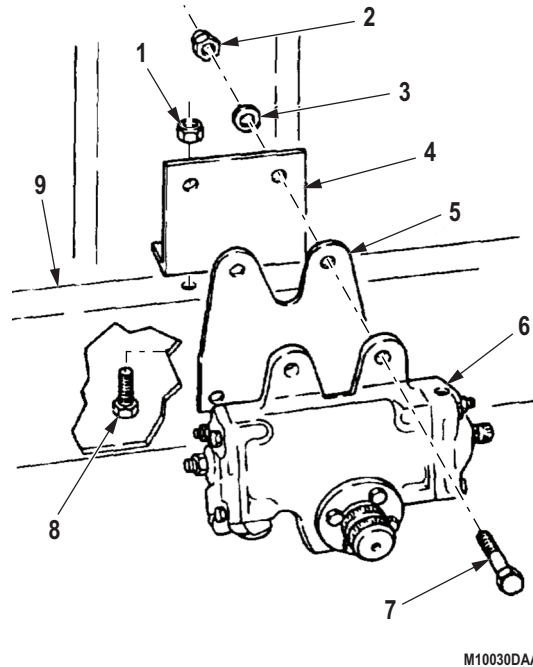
Steering Gear (Ross) and Mounting Bracket Removal.
